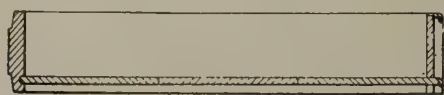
Horizontal Vertical Section Through One of the Drawers—Scale 9/16 In to the Foot
